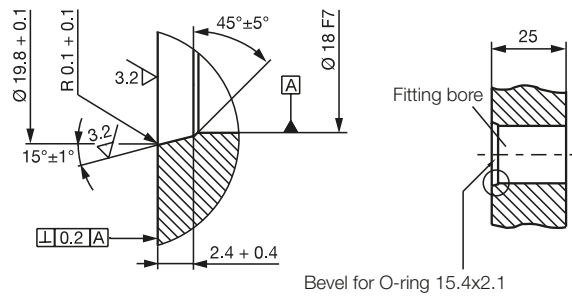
Fitting bore for installing the BTL with O-ring
